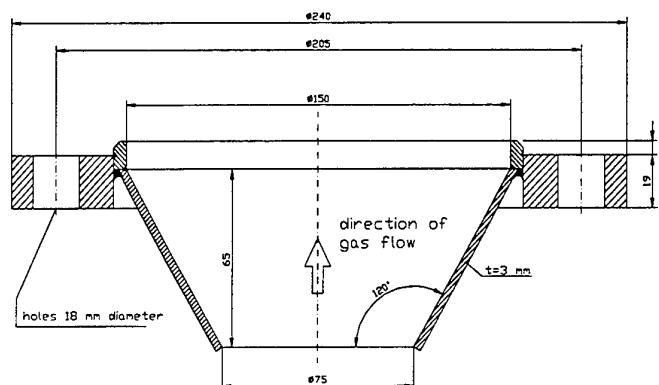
Details of the mixing element installed in the bubbling fluidised bed test rig
